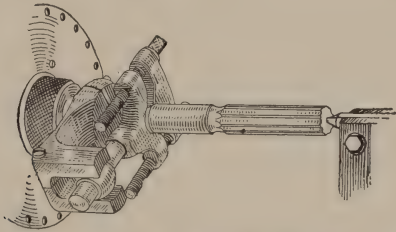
Milling-machine dog. The feature of this dog is the ball-and-socket drive which prevents any tendency to cramp the work. (Courtesy of Ready Tool Company.)
